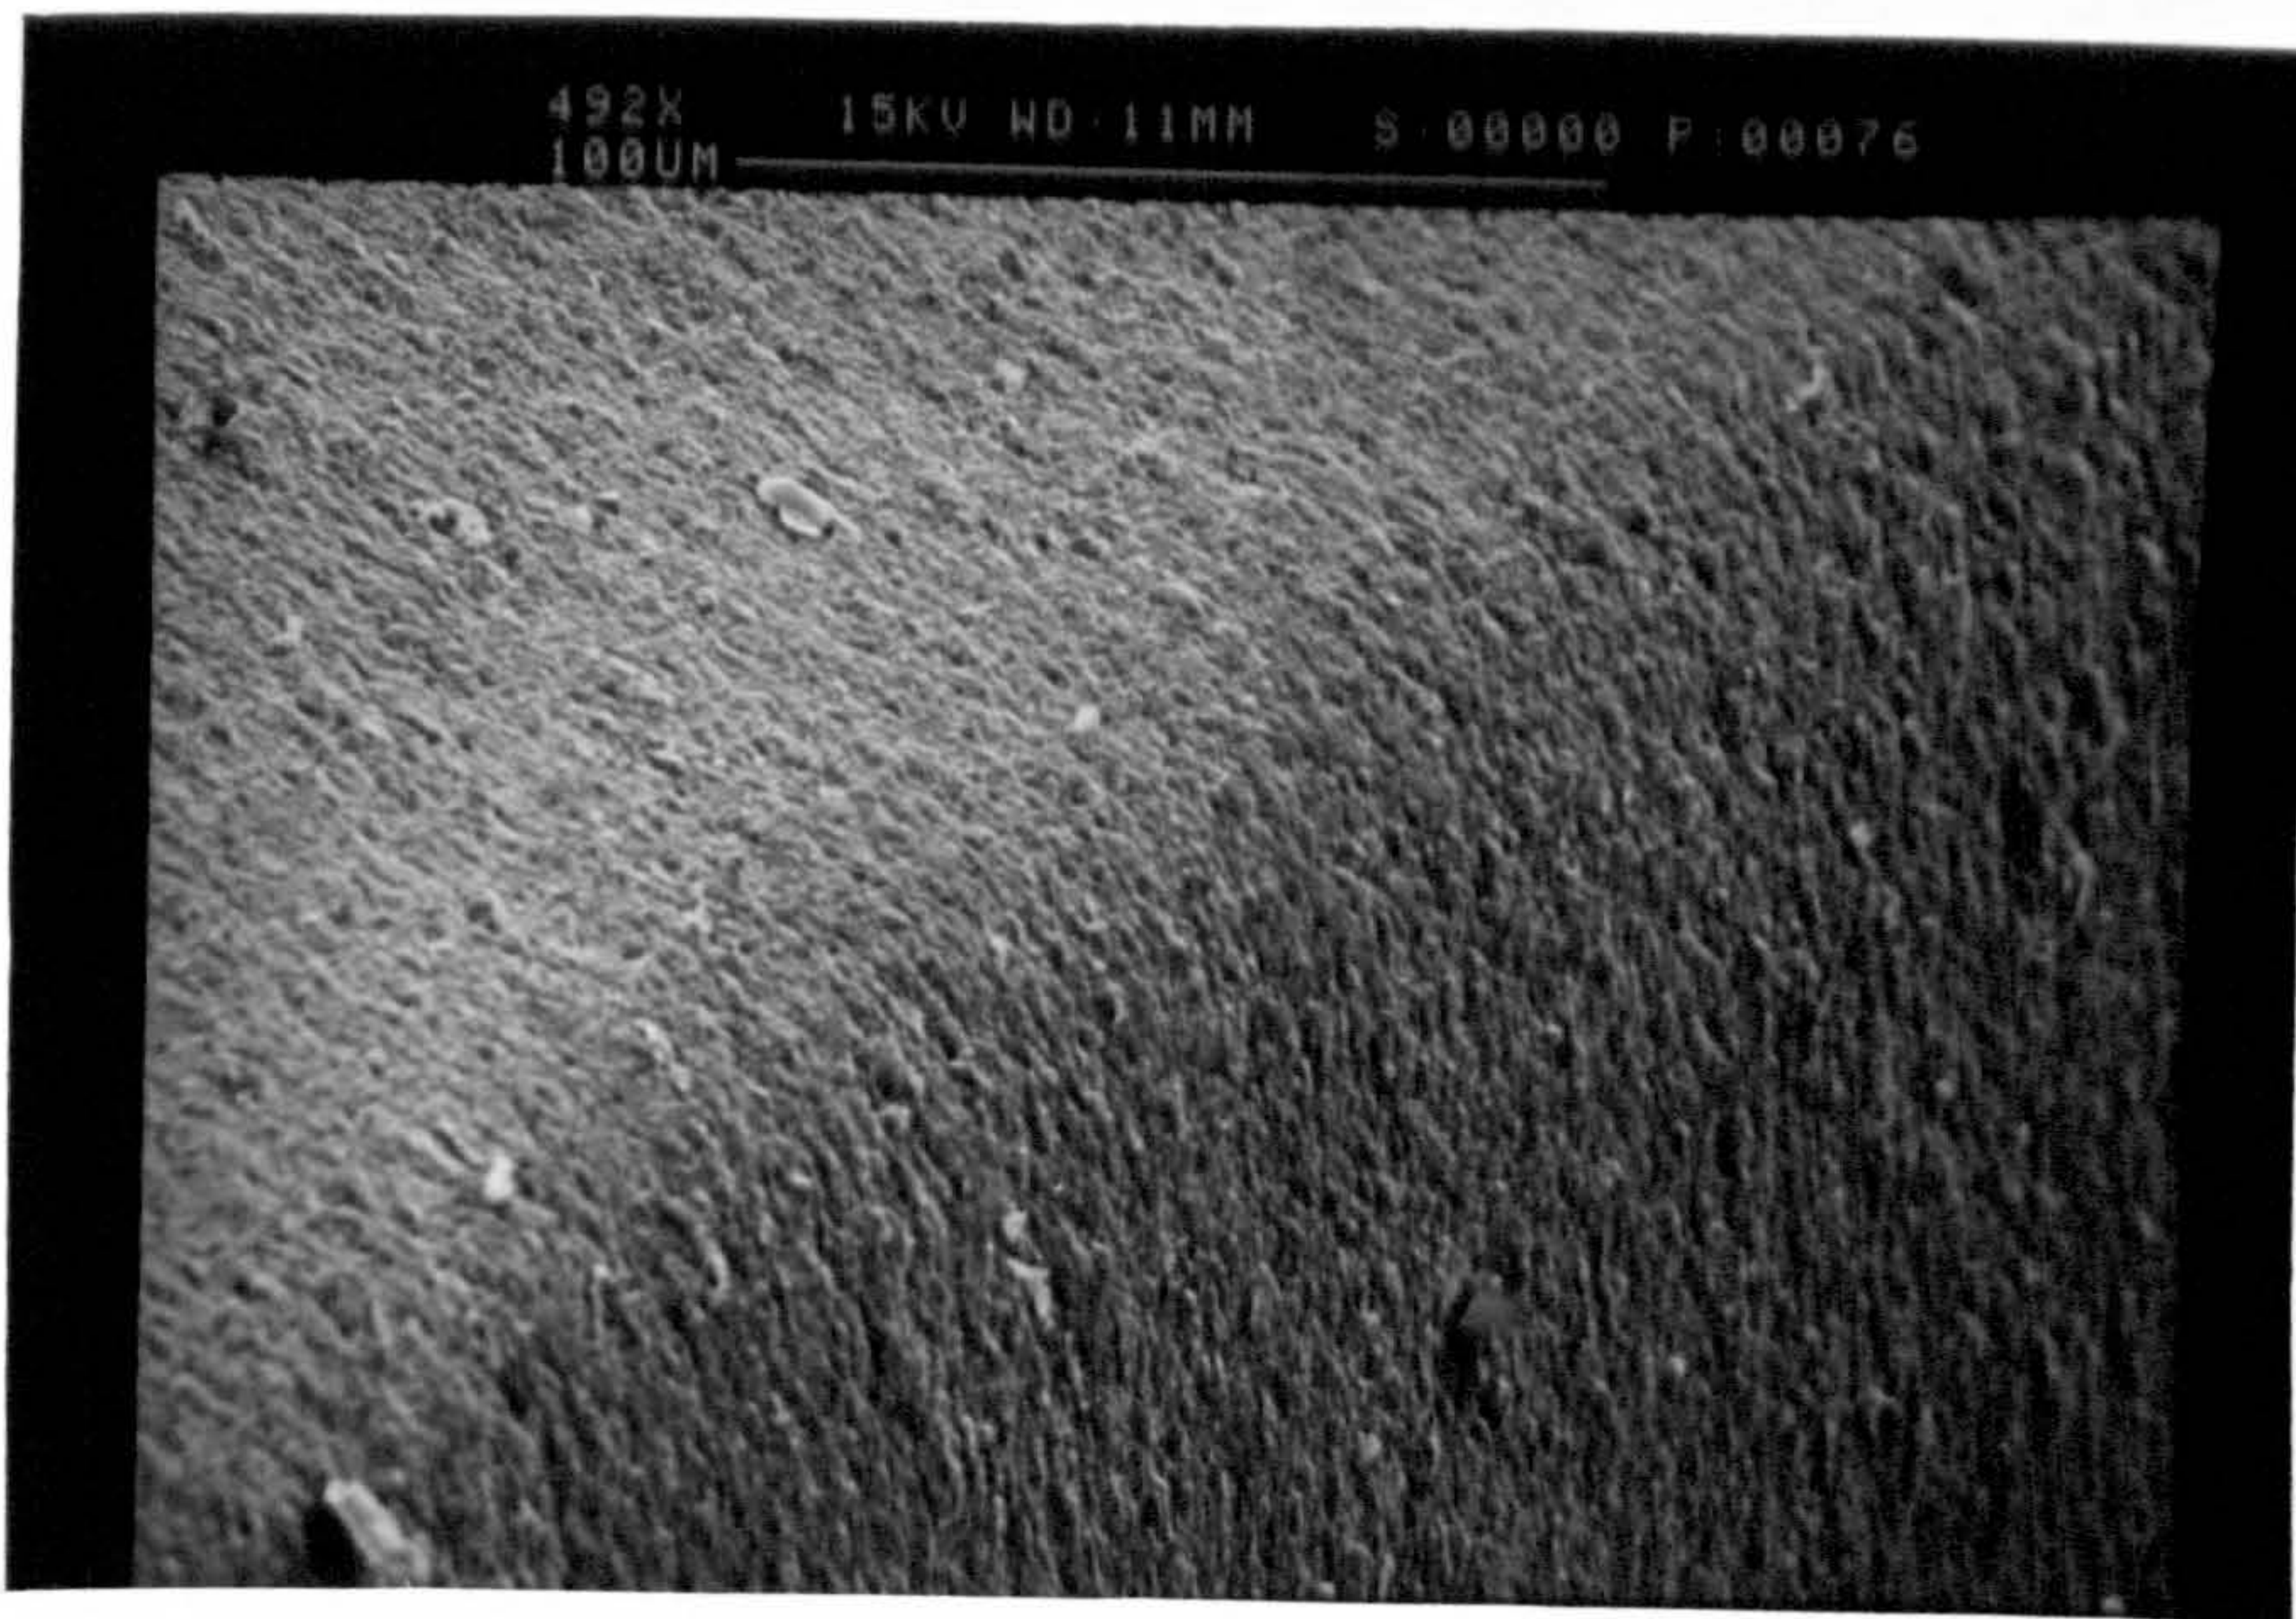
Enlarged view of the cutting edge region showing a rough surface.
